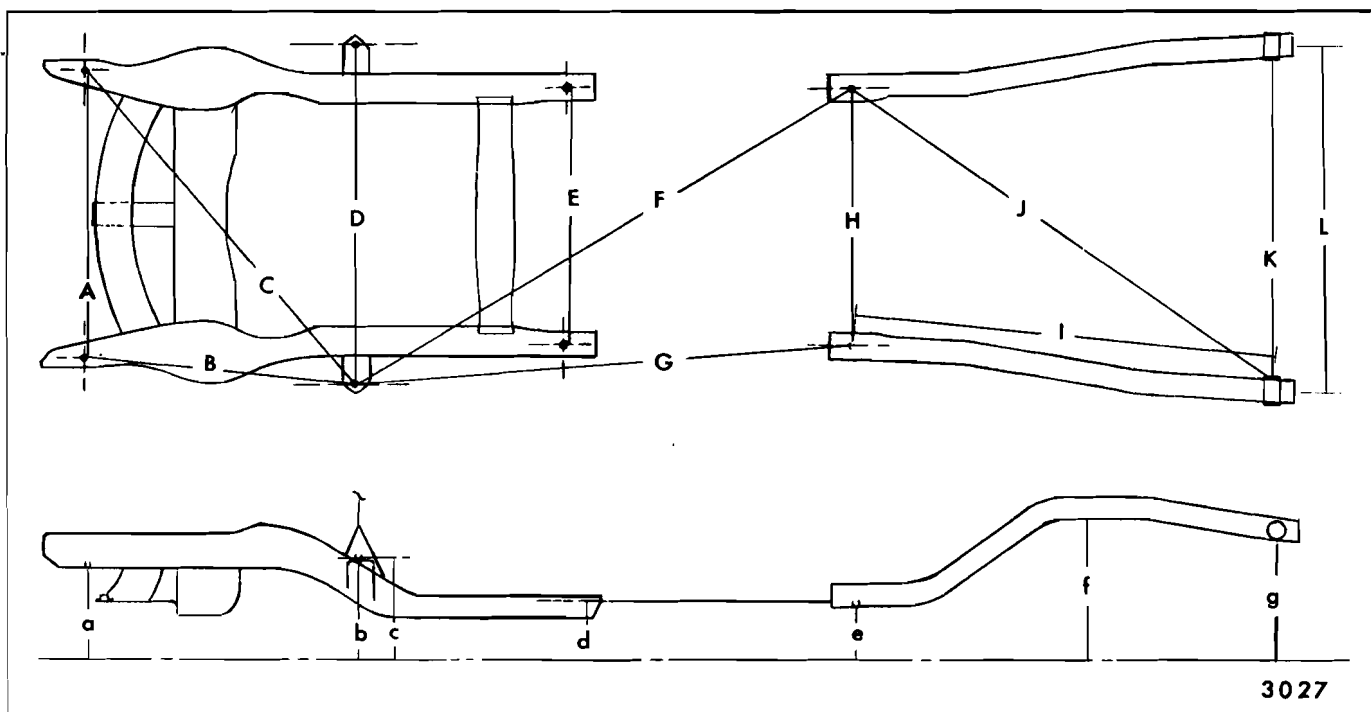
Horizontal & Vertical Checking Dimensions (Camaro & Firebird "F" Bodies)
